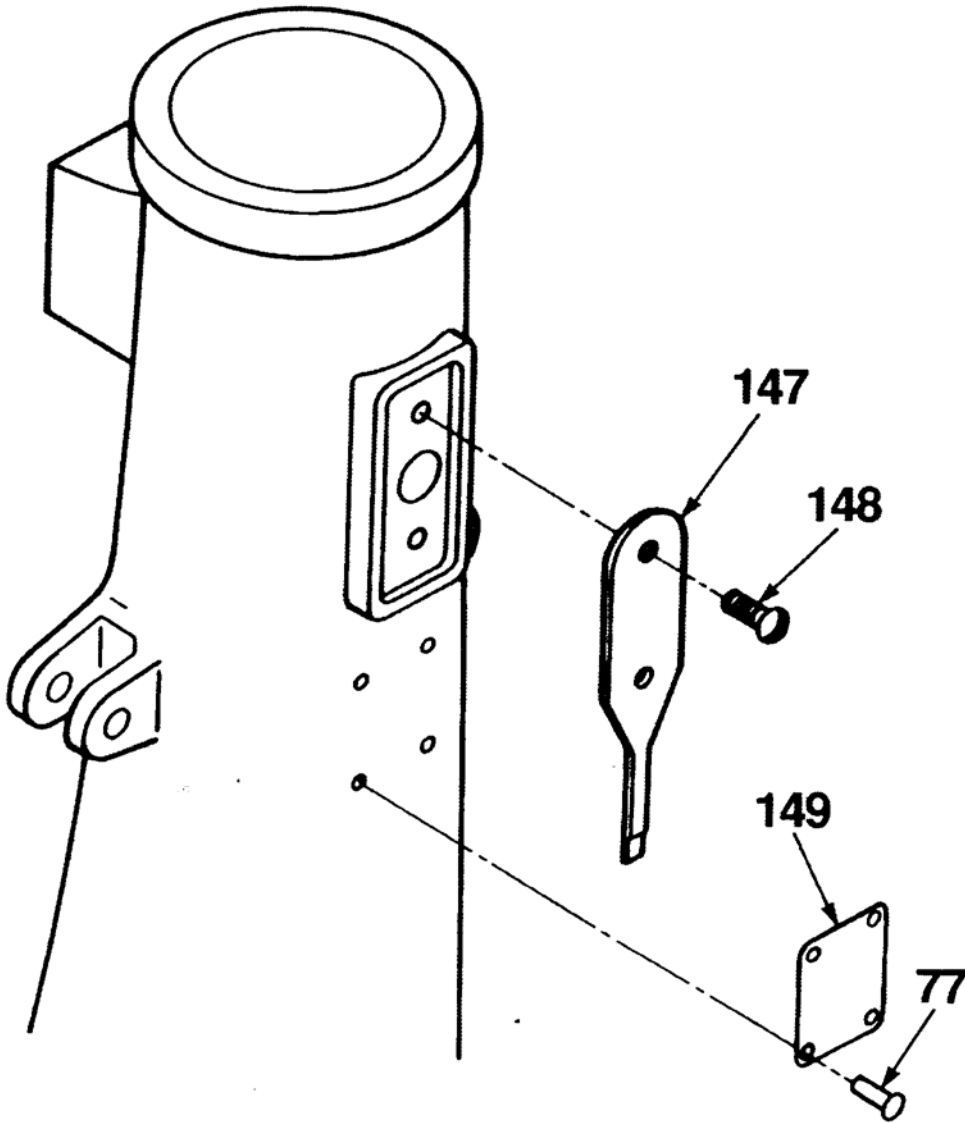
EXPLODED ILLUSTRATION OF GAGE AREA FOR 528CMJ AND 536CMJ JACKS
